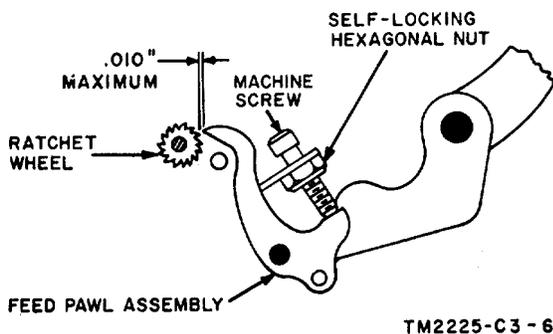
Feed pawl assembly and ratchet wheel clearance adjustment.
